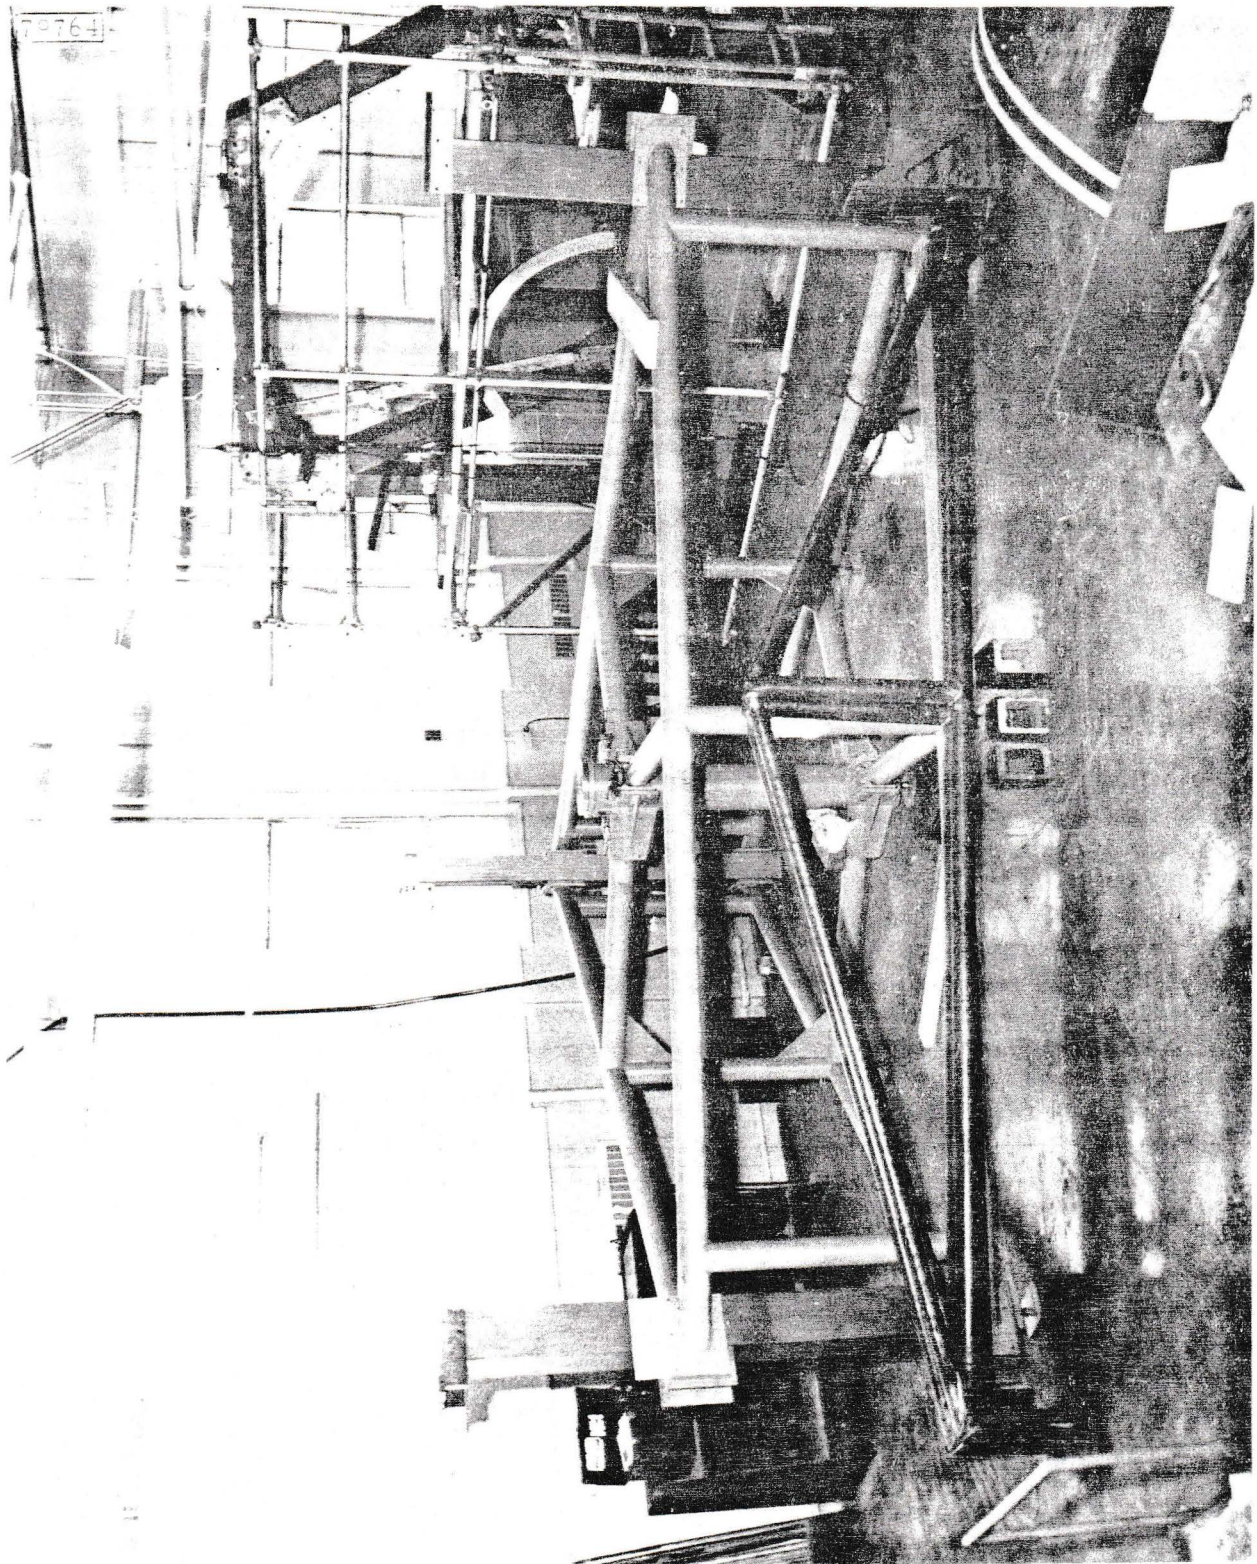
FINAL ASSEMBLY JIG FOR VEHICLE STRUCTURE
